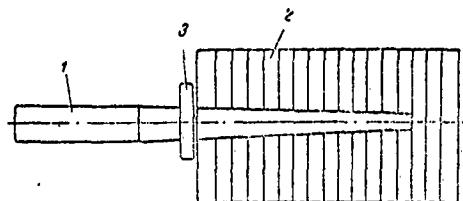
Checking the inner ring bores by means of a tapered mandrel. 1) Tapered mandrel; 2) graduated scale; 3) ball bearing.
